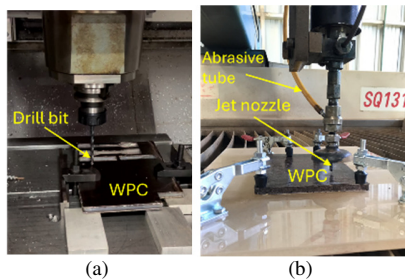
Experimental setup for: (a) hole drilling and (b) hole cutting using AWJ.
